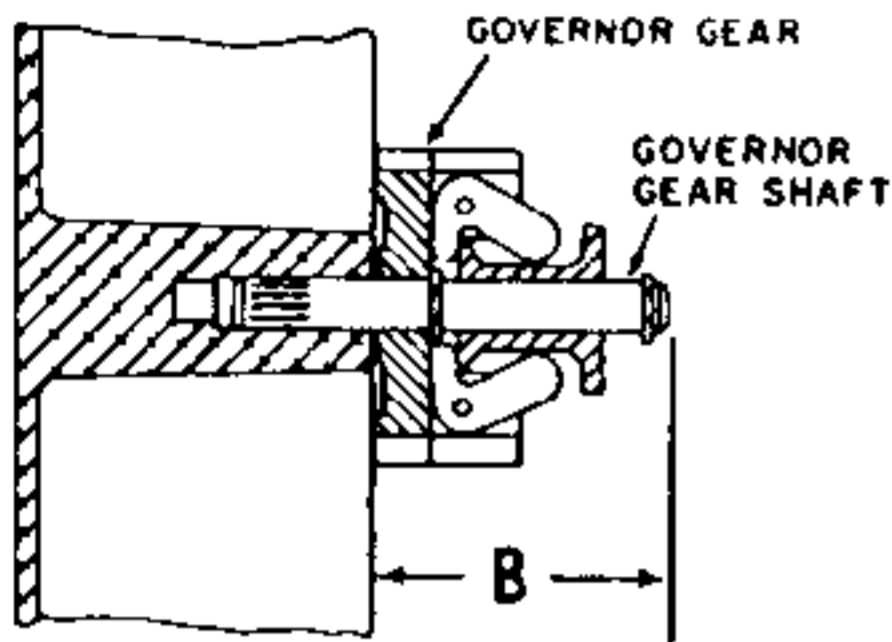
View showing installation of governor shaft and governor gear and weight assembly on Models HH80, HH100 and HH120. Dimension (B) is 1 inch (25.4 mm).
